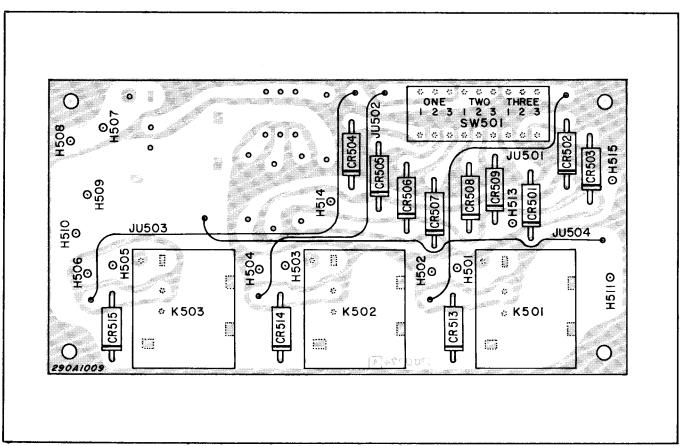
Control Module Relay Circuit Board Parts Location Diagram.
